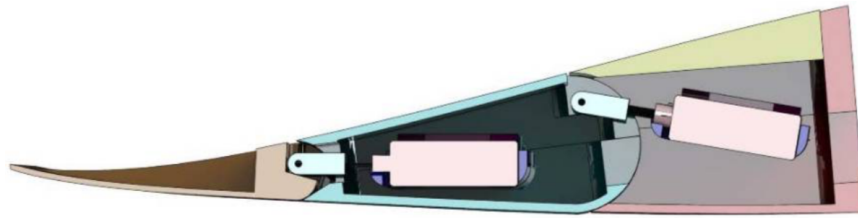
Cutaway View of VCCTEF Actuator Assembly of Flaps 2A and 2B
